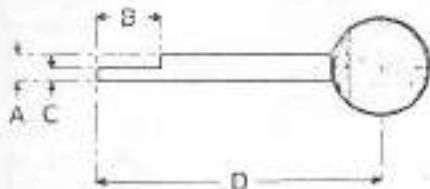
A special tool can be fabricated to help install detent springs, detent balls and shift rails. Rod diameter (A) should be 3/8-inch, length of cut-away (B) should be 5/8-inch, depth (C) should be 3/16-inch. Overall length (D) should be about 6 inches.
